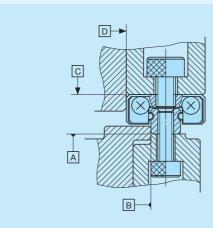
Reference mounting surface of size 2, 3, 4 and 6 series and typical mounting structure
